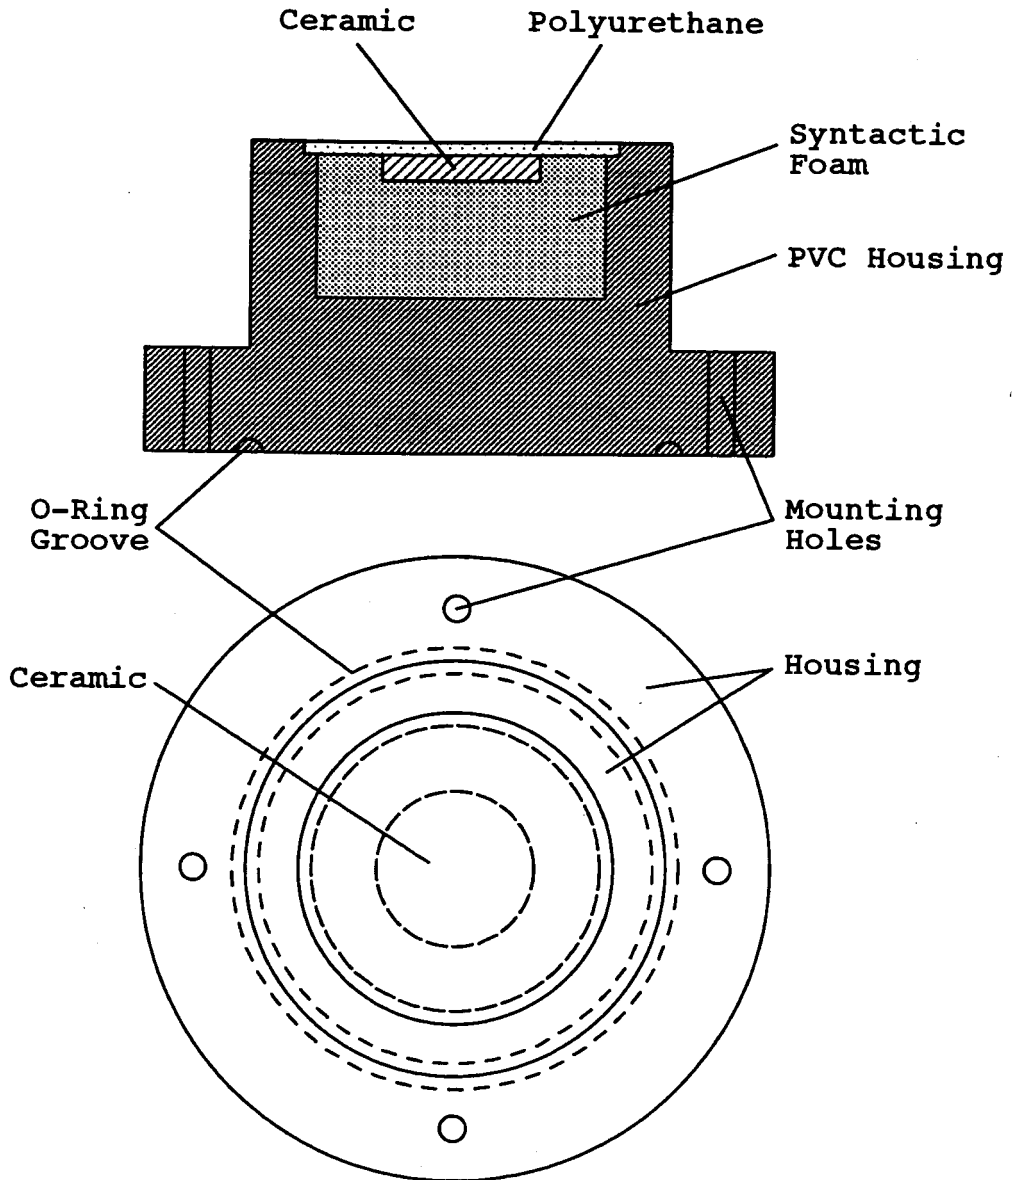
Cross-Sectional and Top Views of Single Element Transducer.
